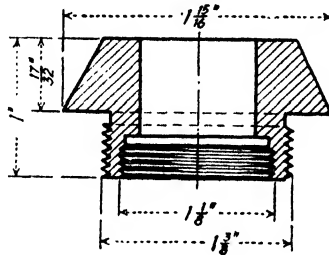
Tapered hollow plug produced on the screw machine but readily producible by die casting at somewhat lower cost if zinc alloy is used.
